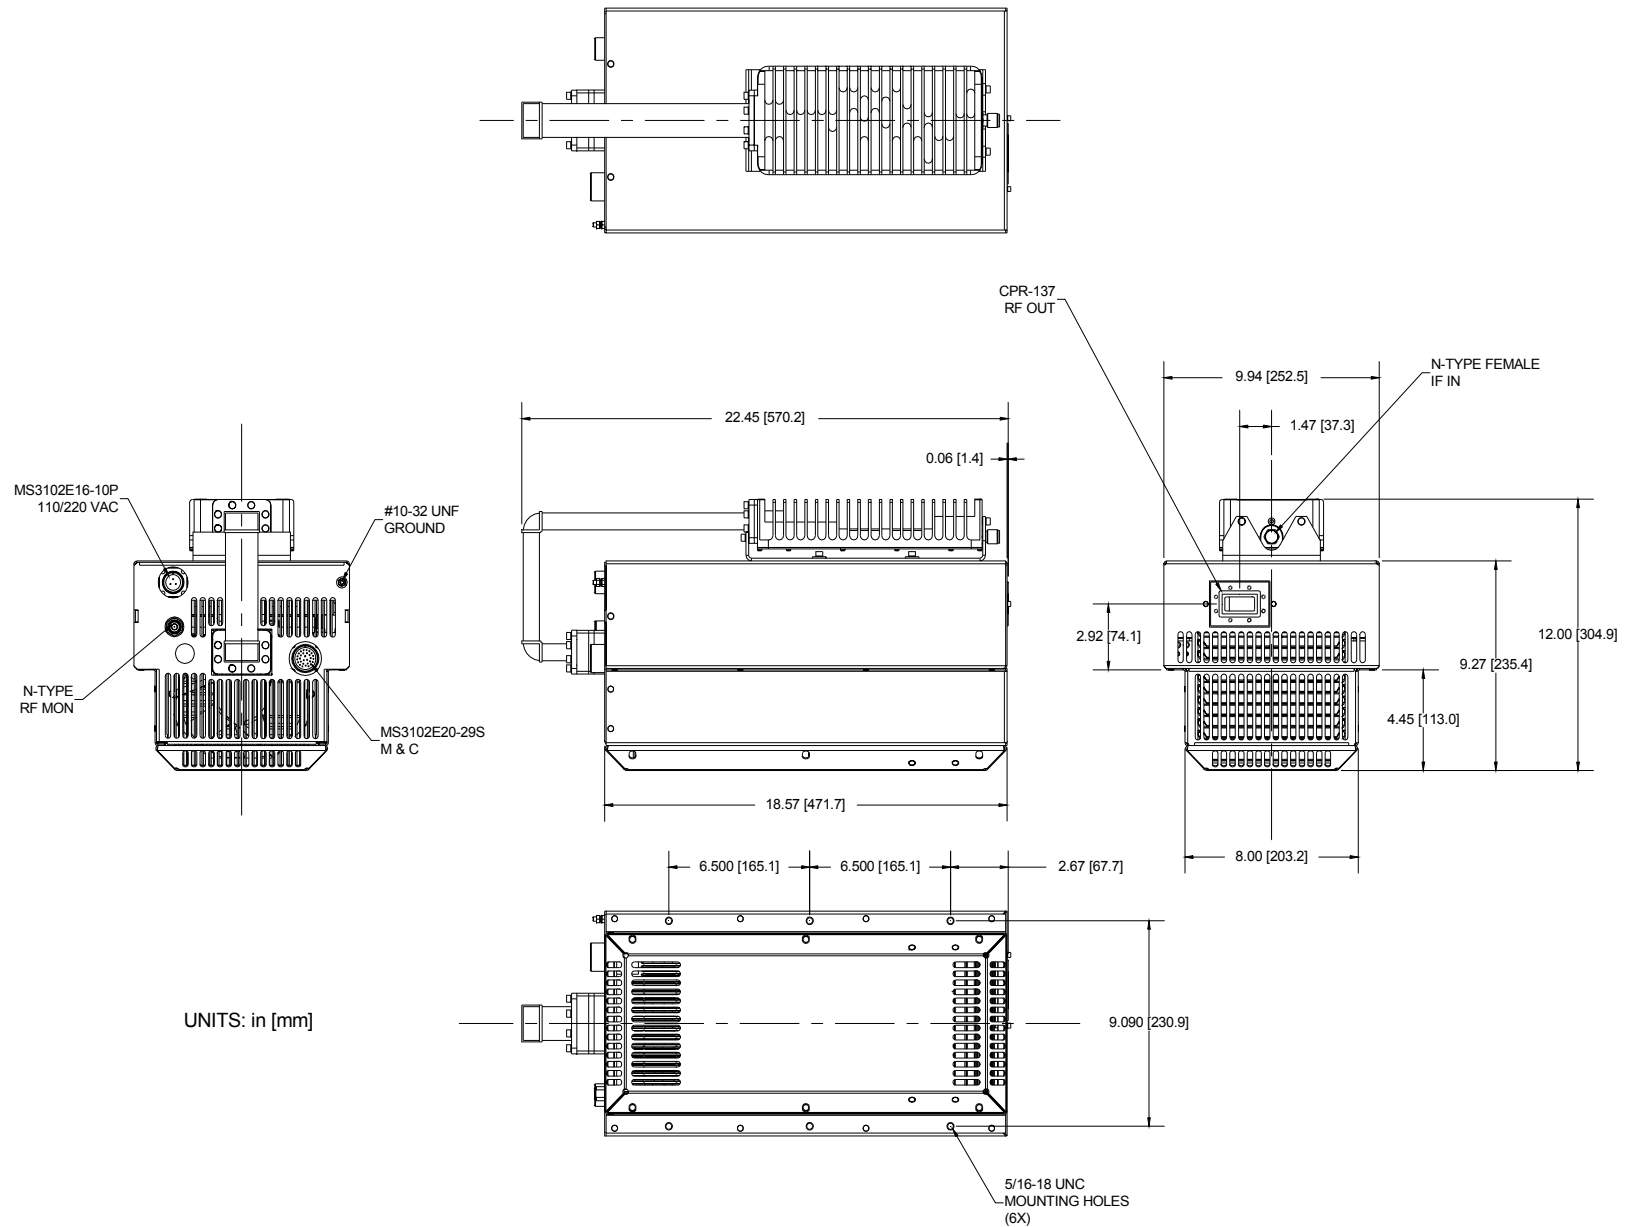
WTX-596450/51/52/53-70-ES-35 Outline Drawing
